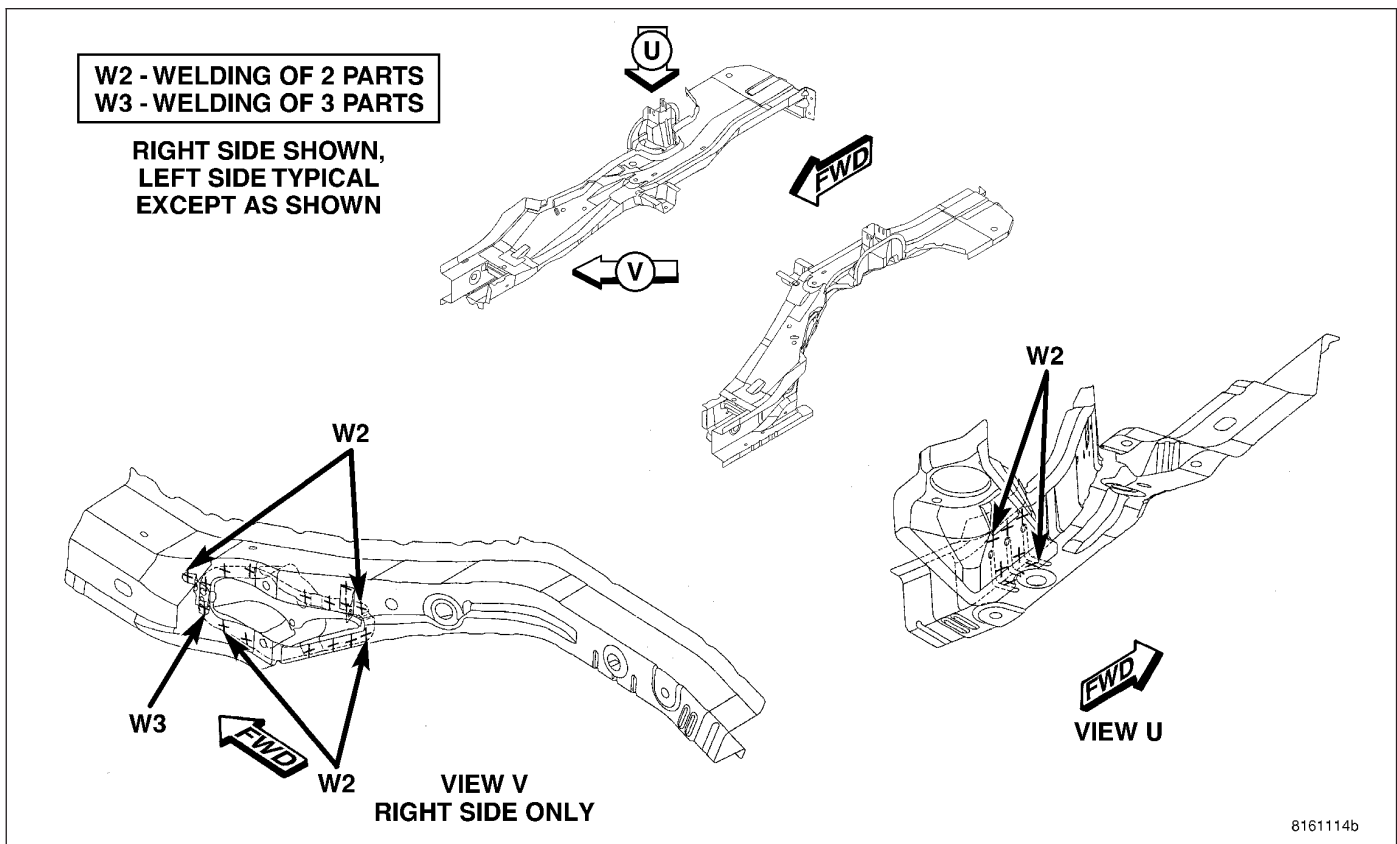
SIDEMEMBER ASSEMBLY (3 OF 17)
